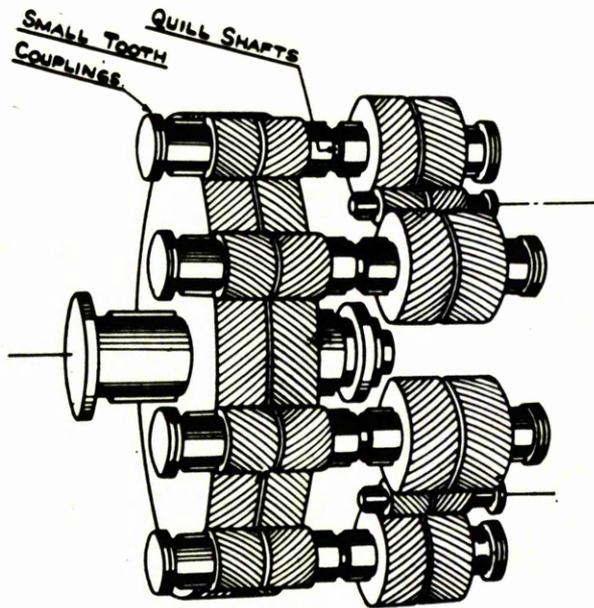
Double Reduction Divided or Locked Train Gear.
